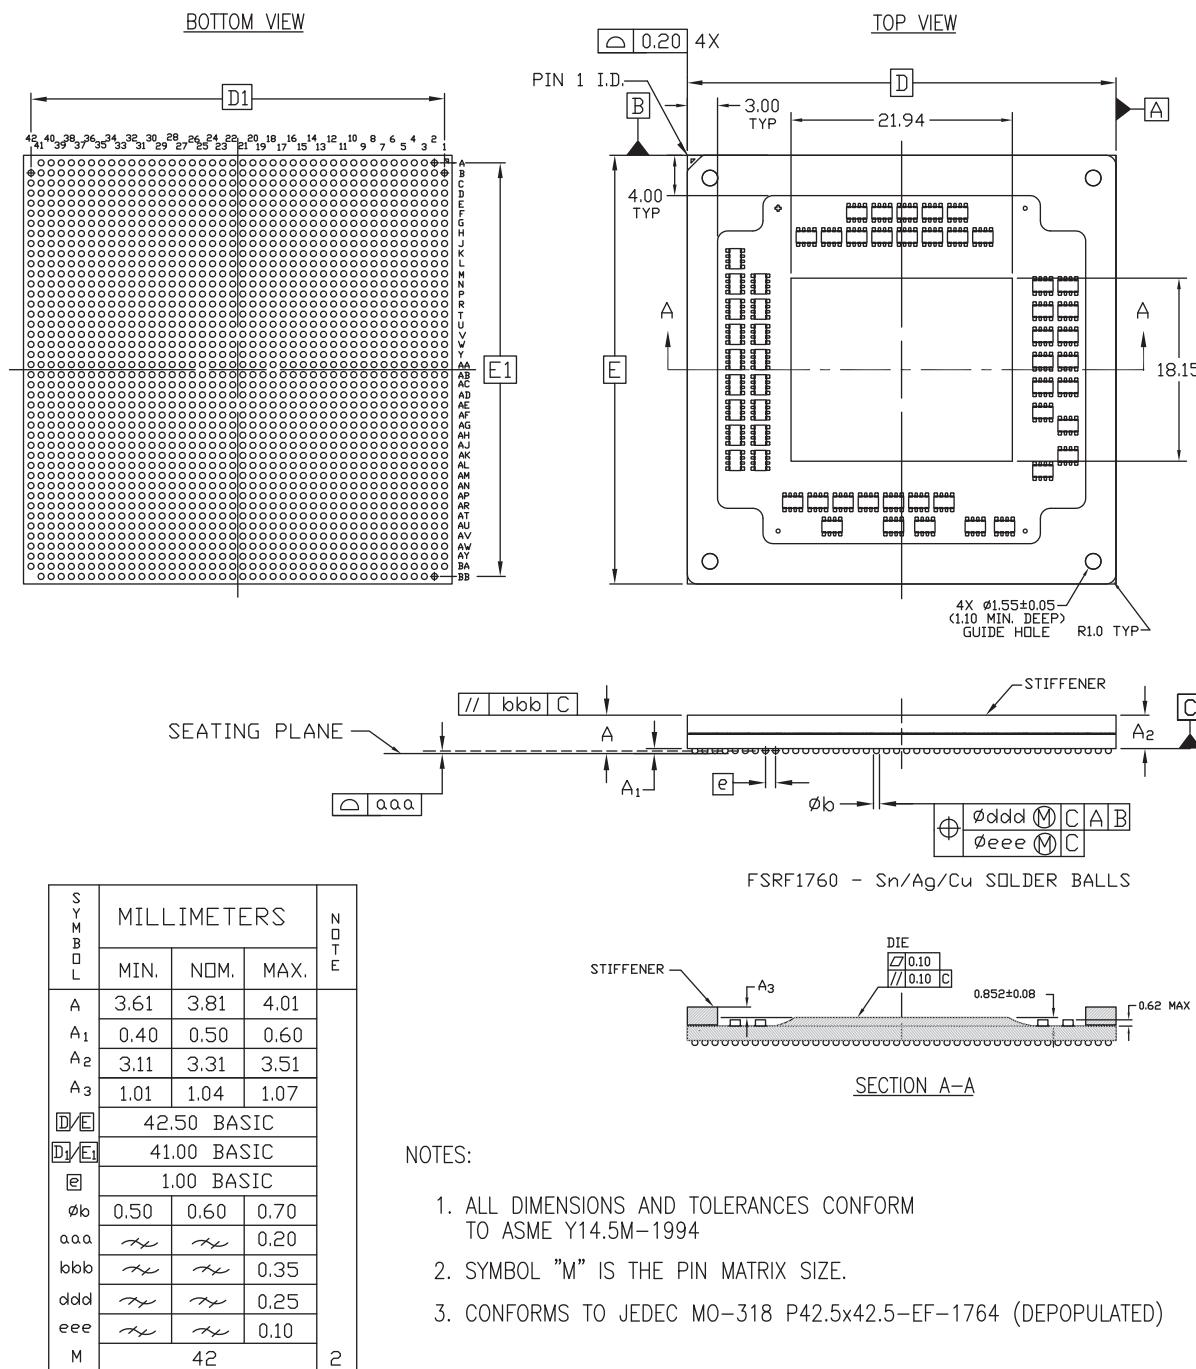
Package Dimensions for FSRF1760 (XQZU49DR)
